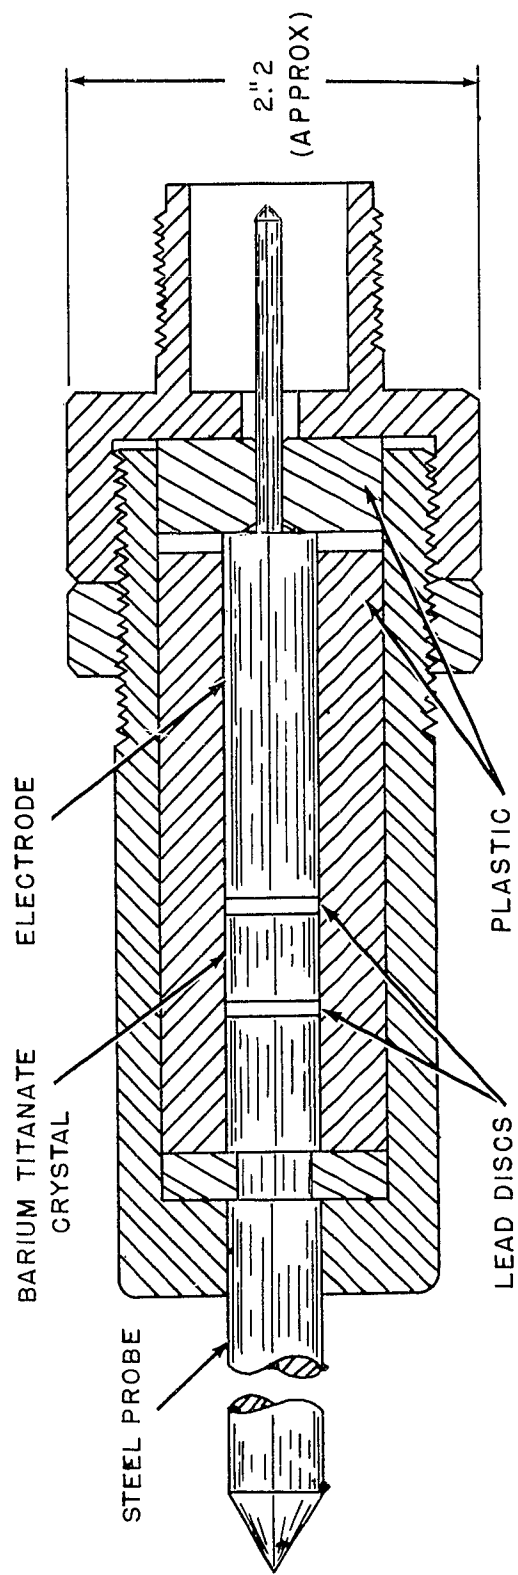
CRYSTAL PICKUP ASSEMBLY
